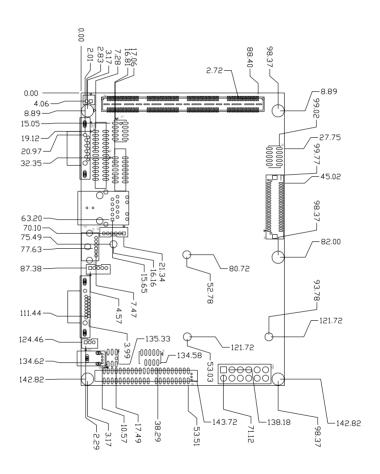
PCM-9380/9386 Mech Drawing (Component)
